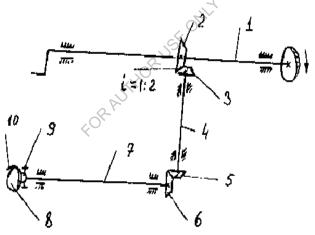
Schematic of the shuttle mechanism of the 1022 class machine. In the picture: 1 main shaft. 2,3,5,6 - conical gears. 4-vertical shaft. 7-shuttle vali. 8-shuttle. 9 fixing screws. 10-shuttle nose.
